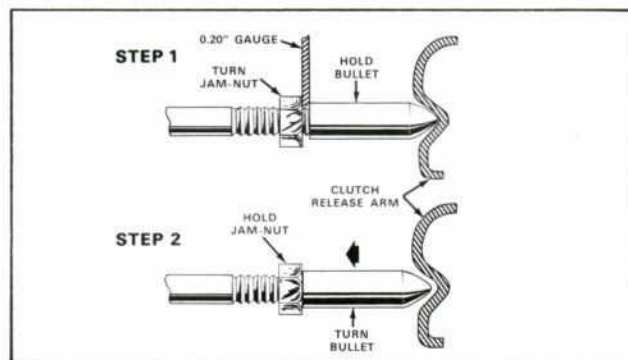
ADJUSTING CLUTCH RELEASE ROD
